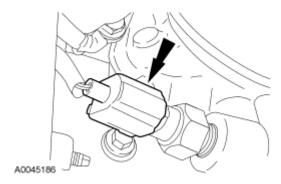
Oil Pressure Sender Electrical Connector Courtesy of FORD MOTOR CO.
